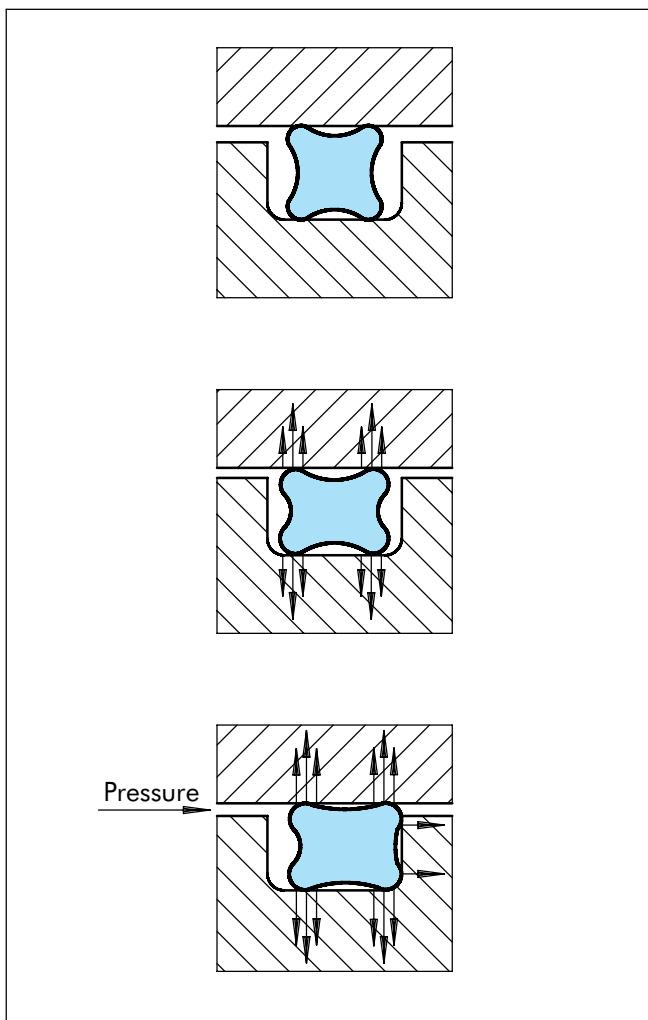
QUAD-RING® Seal squeeze with and without system pressure
